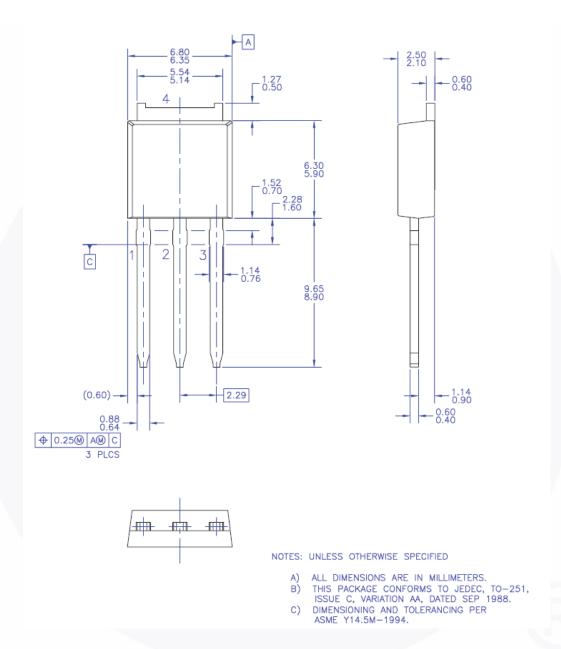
TO-251 (I-PAK), Molded, 3-Lead, Option AA
